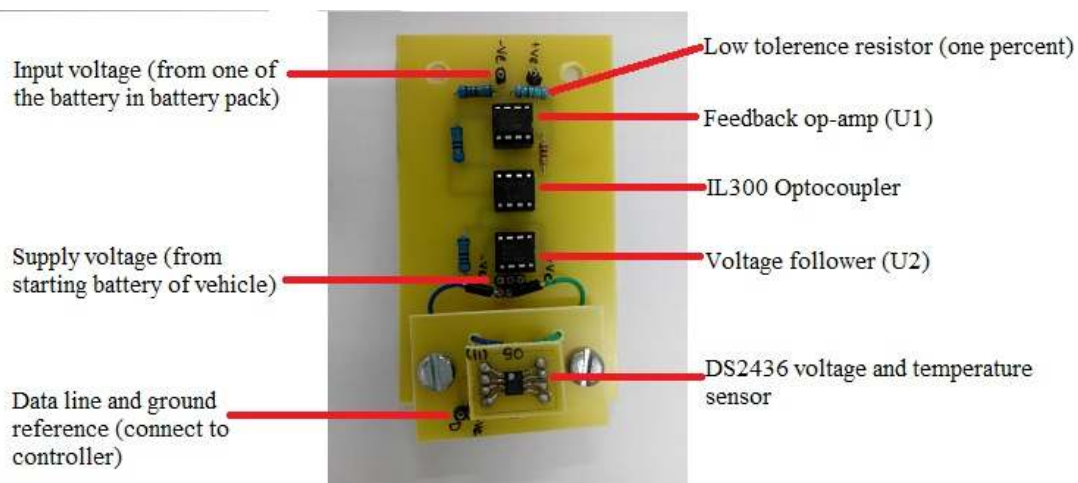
Circuit of DS2436 Sensor Module Built on PCB Board
